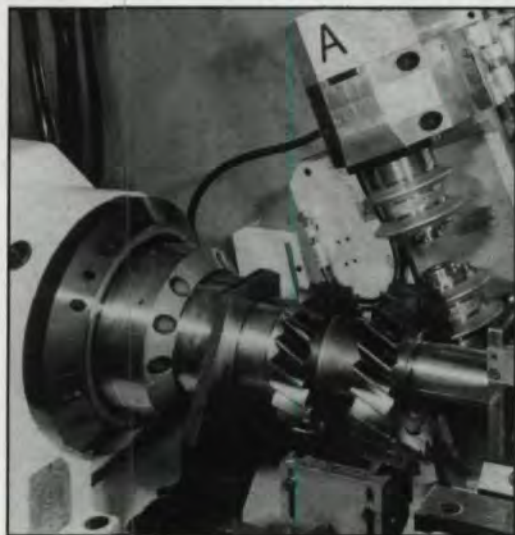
Multiple workpieces can be clamped in one setup for improved productivity.
